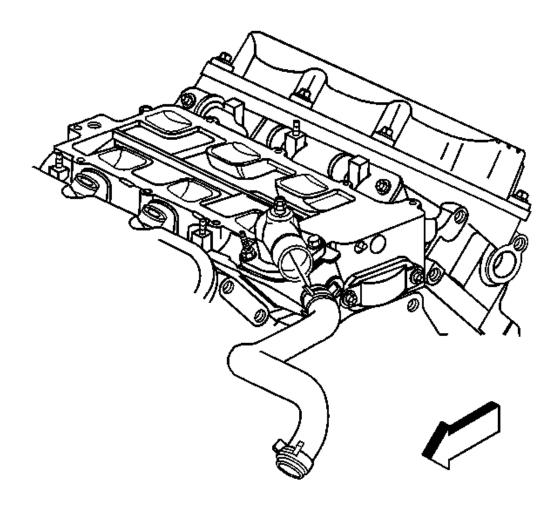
Radiator Inlet Hose Courtesy of GENERAL MOTORS CORP.
